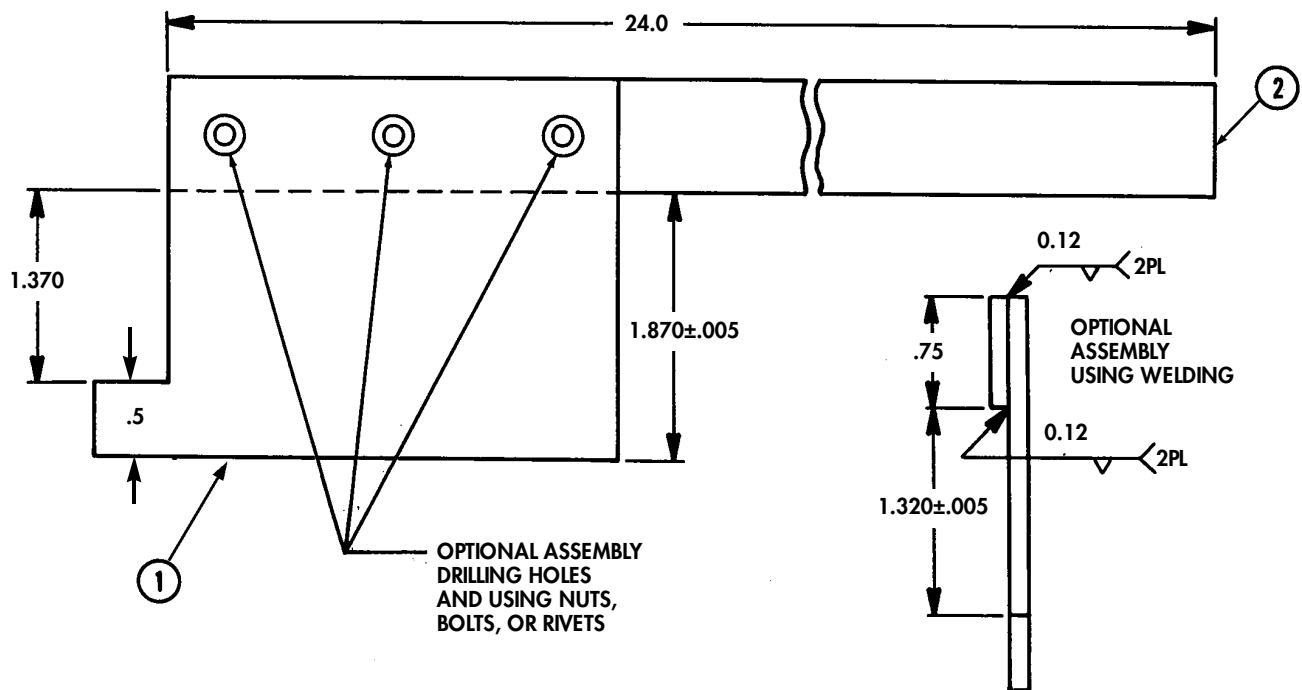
Pulley Alignment Tool Fabrication (Cont'd).
